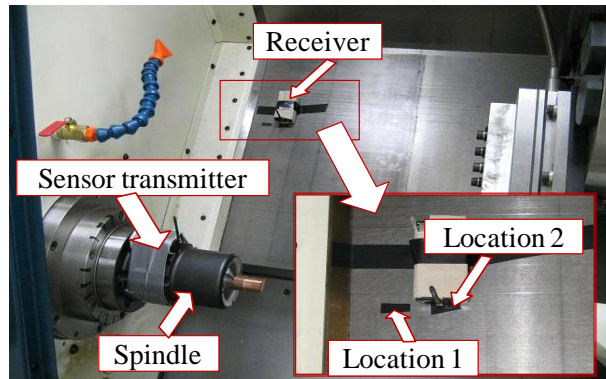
Transmitter and receiver placement in the CNC lathe
